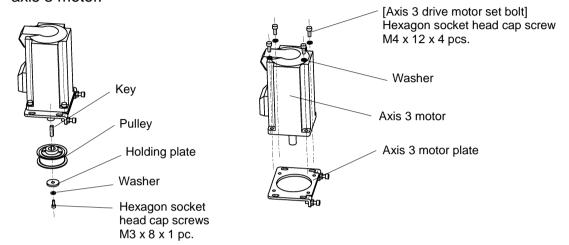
Dismounting axis 3 motor pulley and plate (KHL-500, KHL-600, KHL-700)
